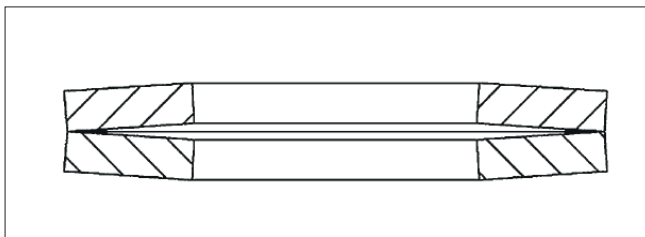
Proper Disc Spring Arrangement (uncompressed)
